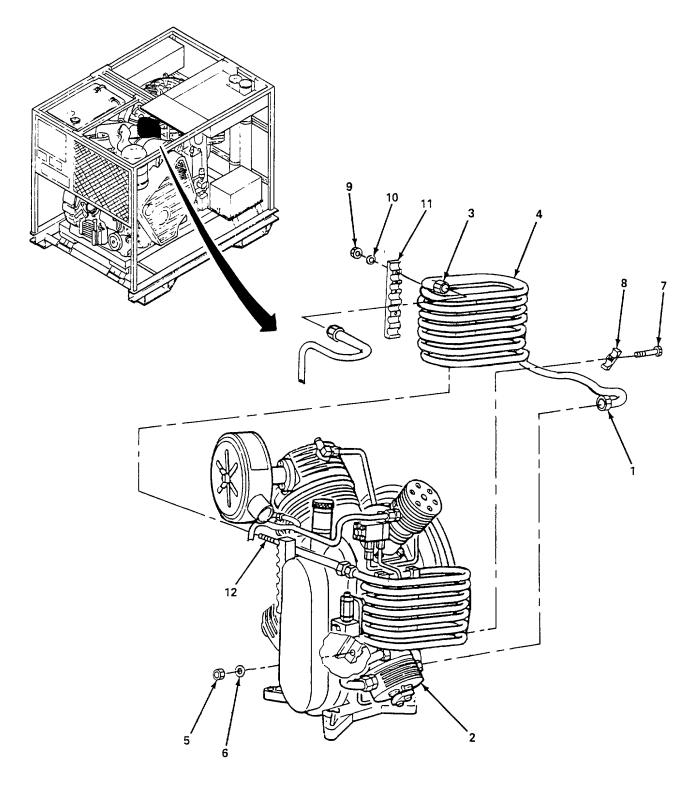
Compressor 2nd Stage Intercooler, Replace.
